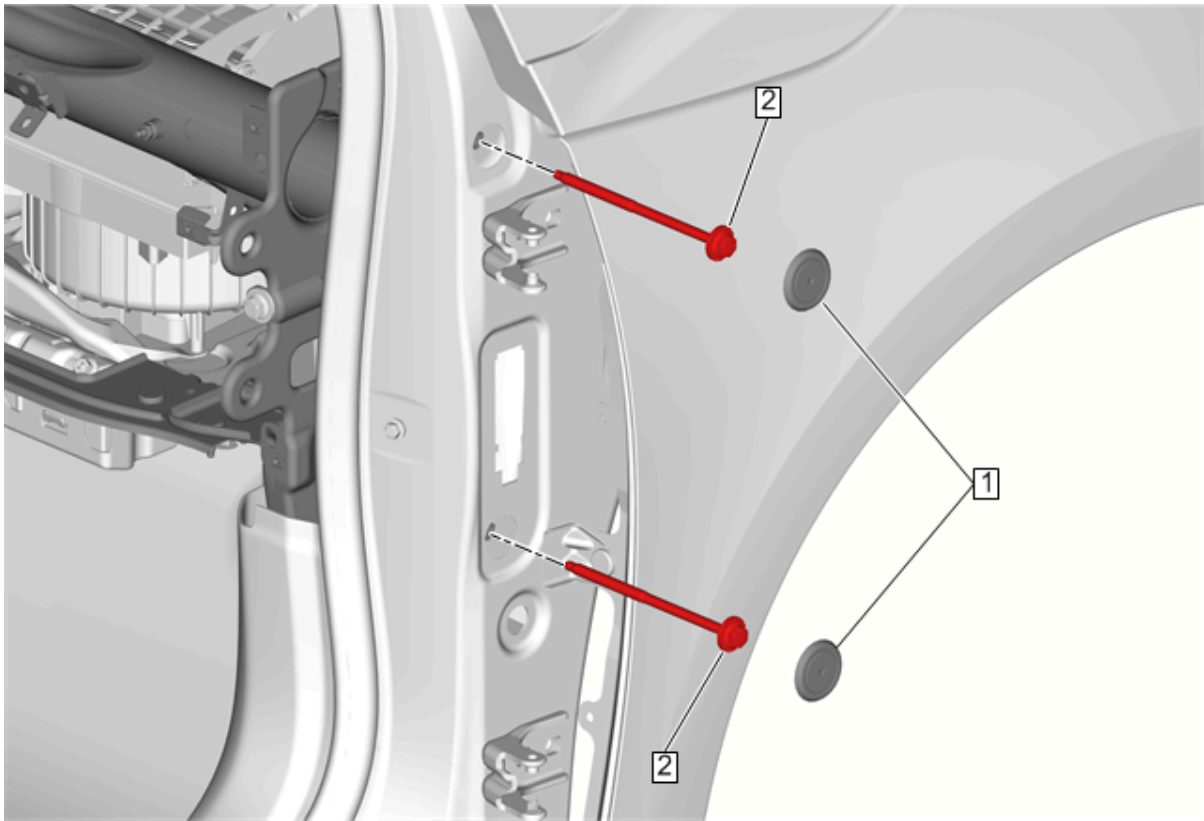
Body Hinge Pillar Outer Panel Hole Plug And Bolt
